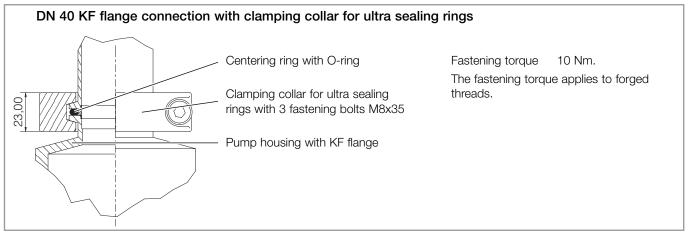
Mounting the DN 40 KF high vacuum flange
